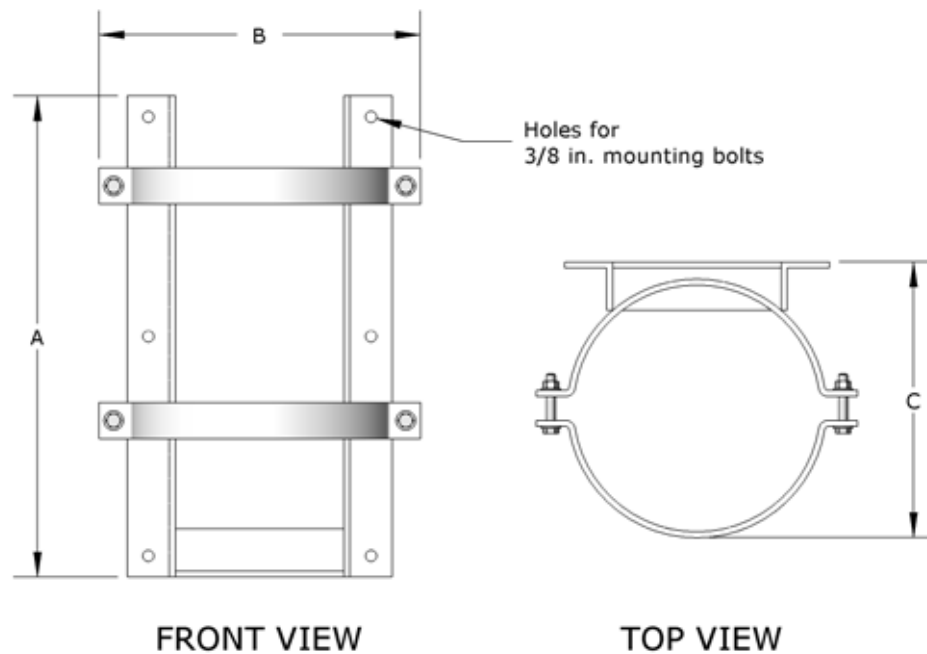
Sentinel DCS-25, DCS-50S, and DCS-50T Cylinder Mounting Bracket Dimensions
